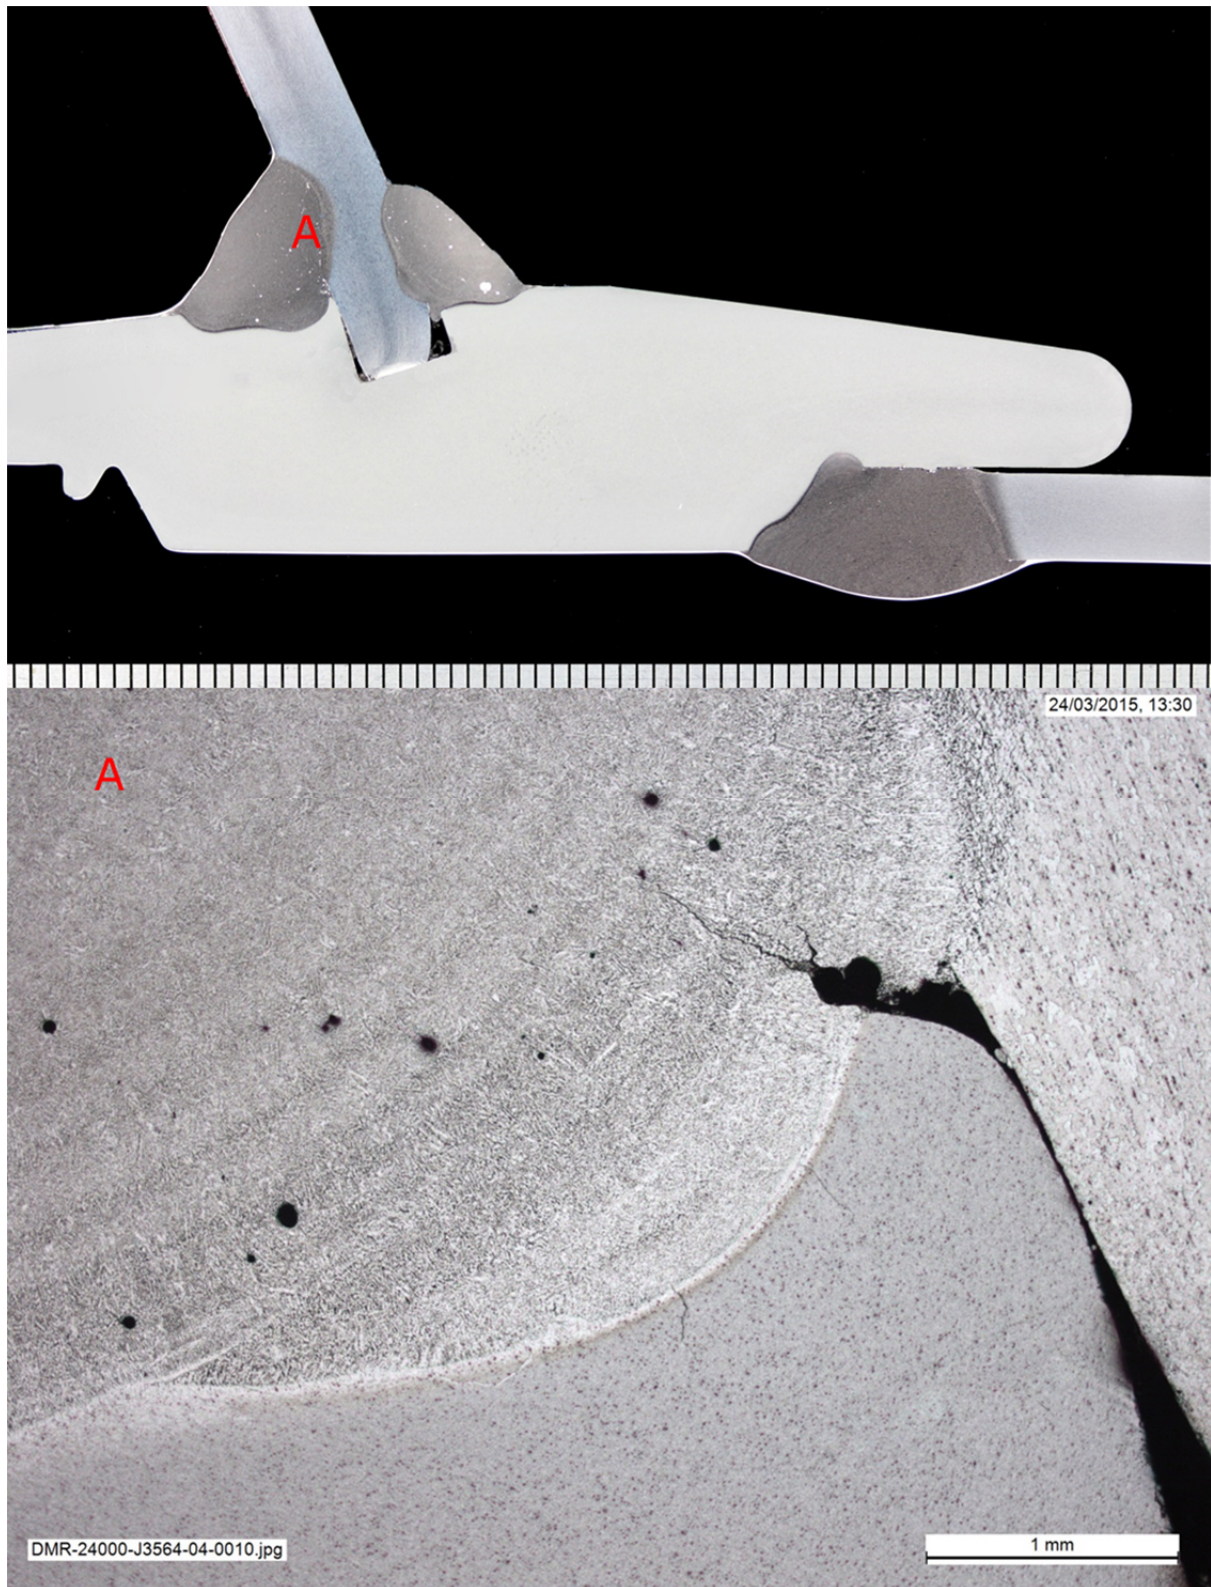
J3564 Sample W-02 from the rear weld.
